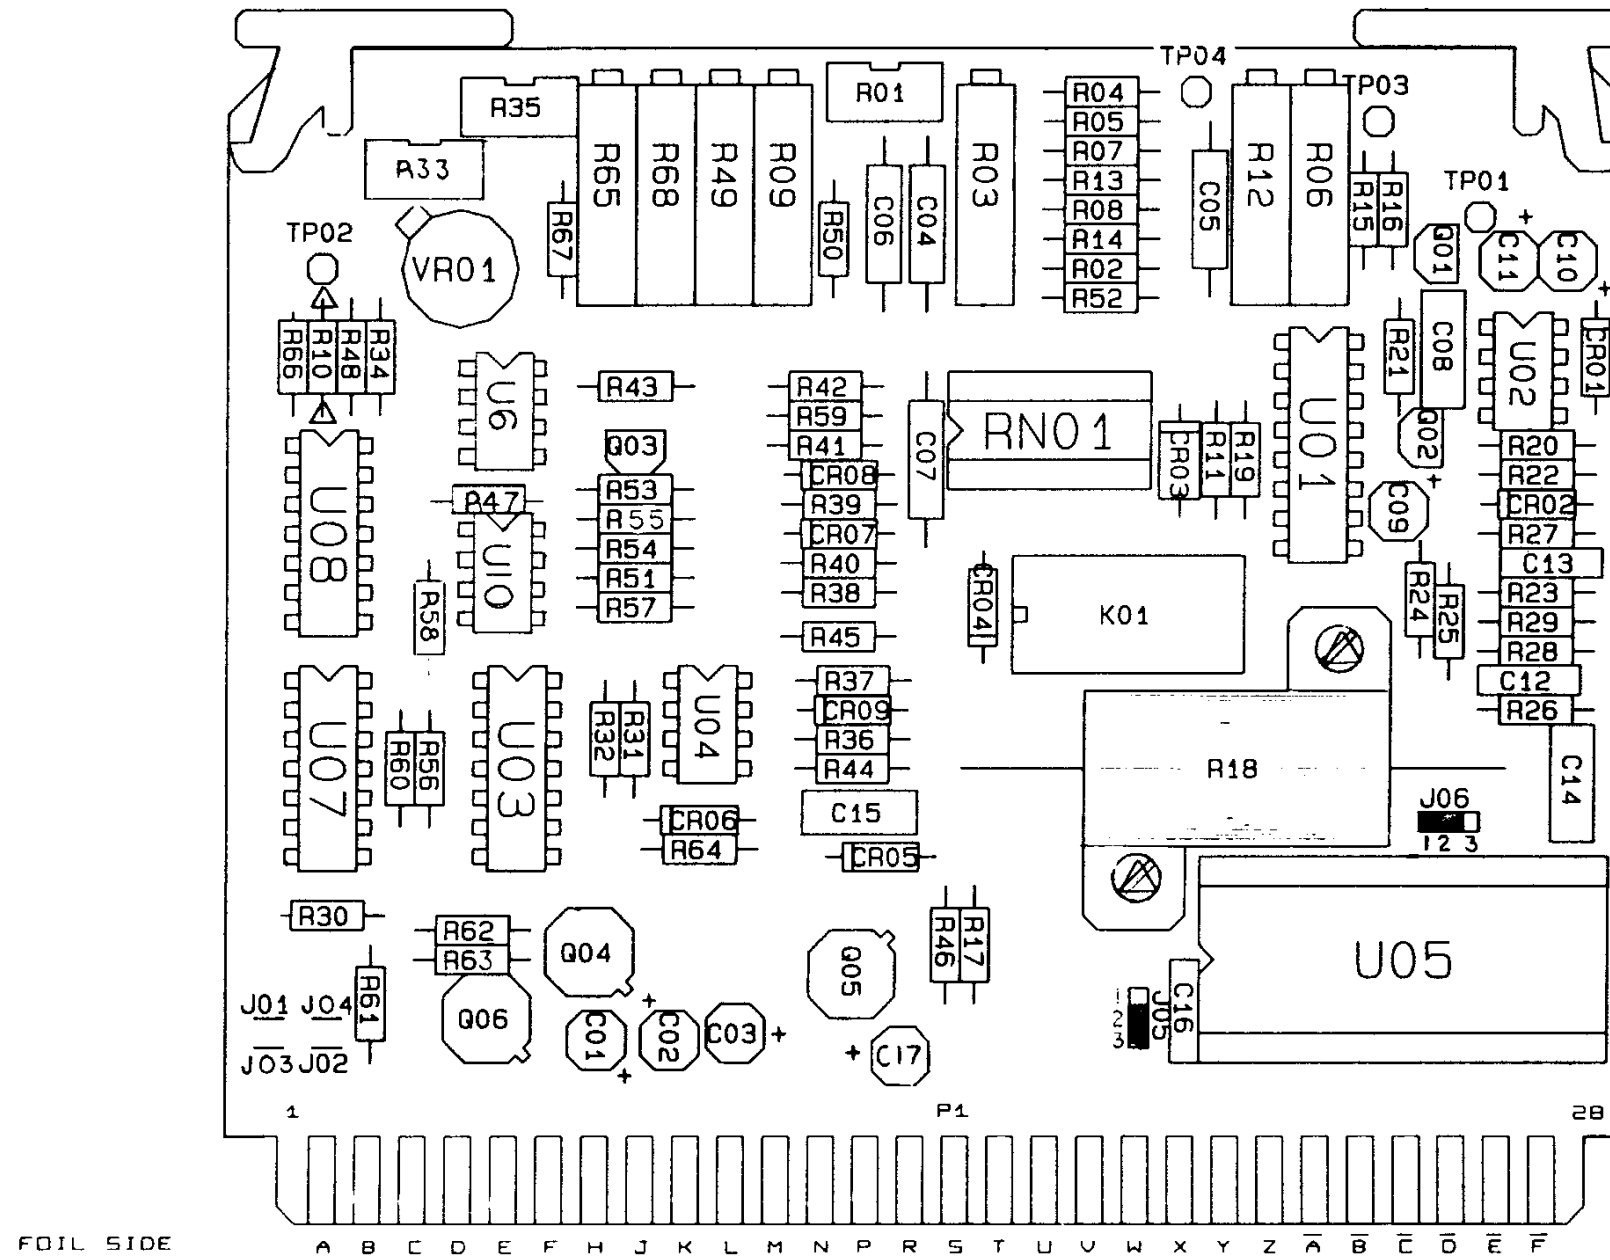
A1A8 YIG Driver PCB Parts Locator, Assy D32108-3
